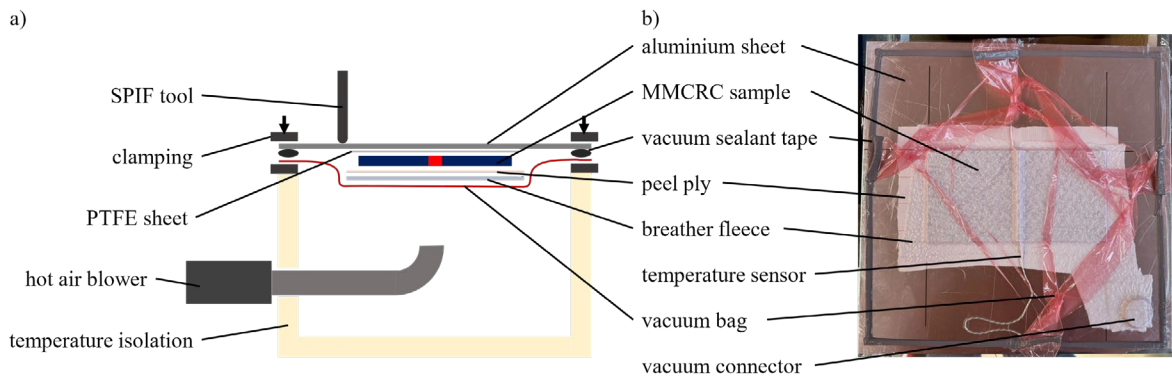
a) Sectional drawing of the vacuum stack layup clamped on the SPIF setup; b) Vacuum setup, view from bottom side
